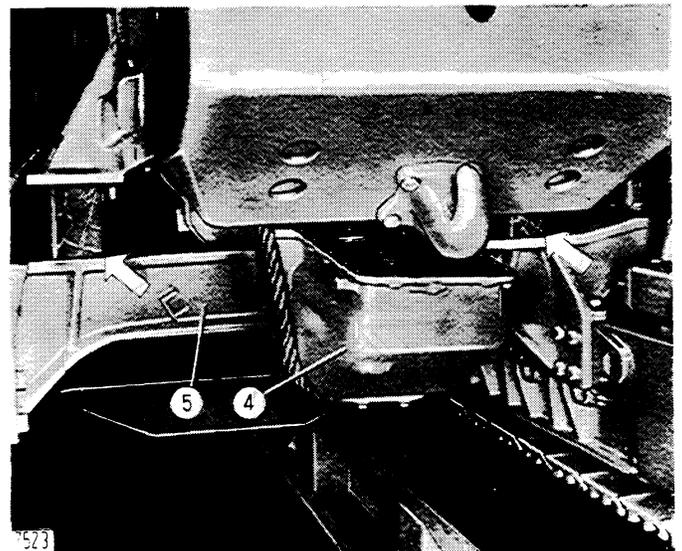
Removing (or Refitting) the Oil Sump with the Engine in Position on the Machine
